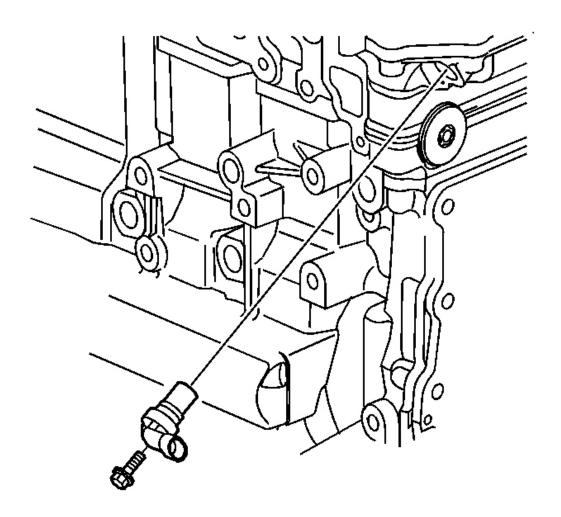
View Of Exhaust Camshaft Sensor Courtesy of GENERAL MOTORS CORP.
